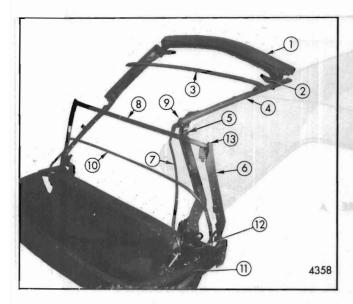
Inward Folding Top Mechanism (Less Trim) Partially Lowered
